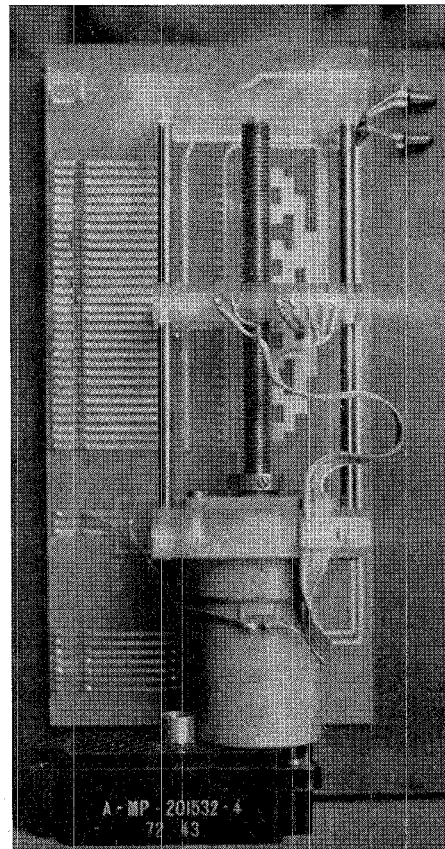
Motor driving set mounted on the P.C. board of fig. 1,
